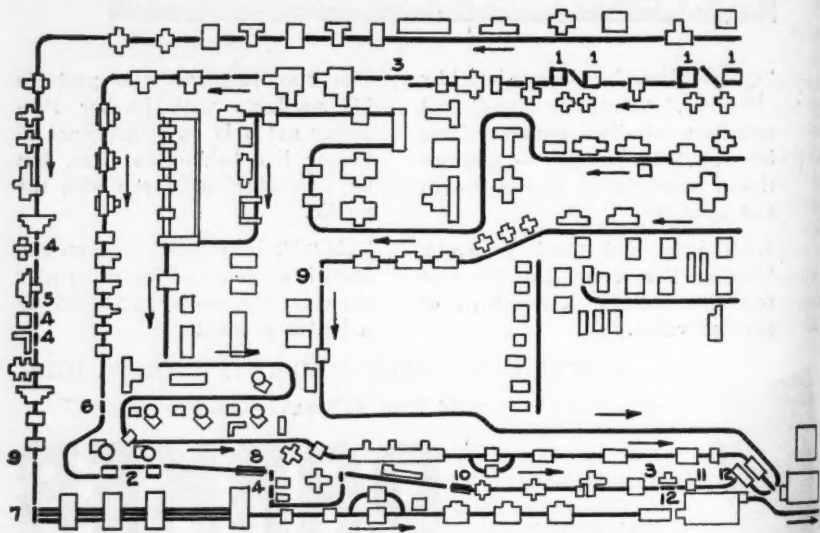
Layout of cylinder department at Lycoming Manufacturing Company's plant, showing conveyor lines.
